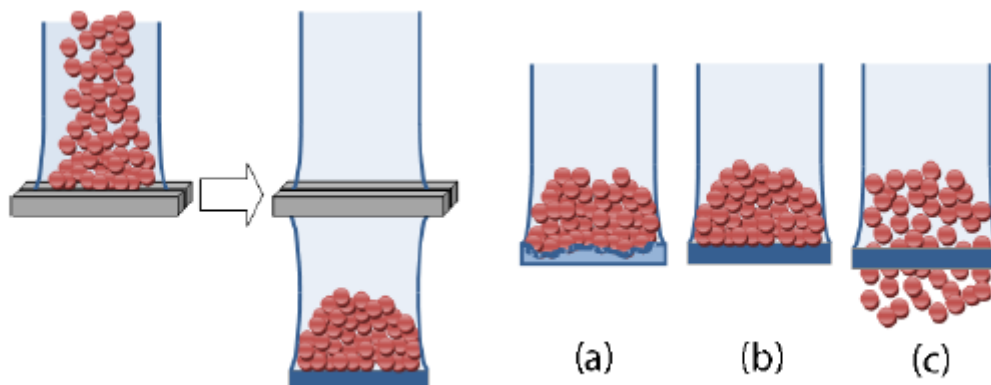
The schematic of weight bearing of seal in a VFFS process while it is still molten and hot (a) a deformed seal (b) a good seal (c) a weak seal with poor hot-tack (Najarzadeh & Ajji, 2014a)
